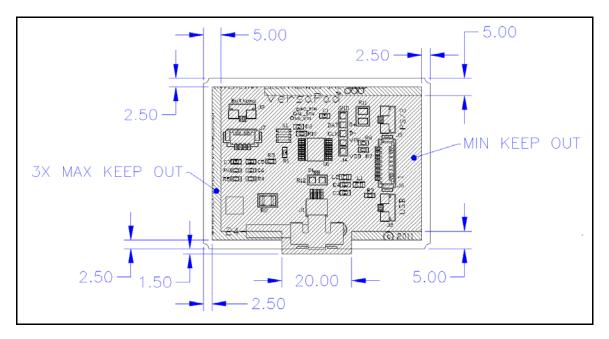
Mounting Bracket & Keep out Area. Drawing is not to scale
